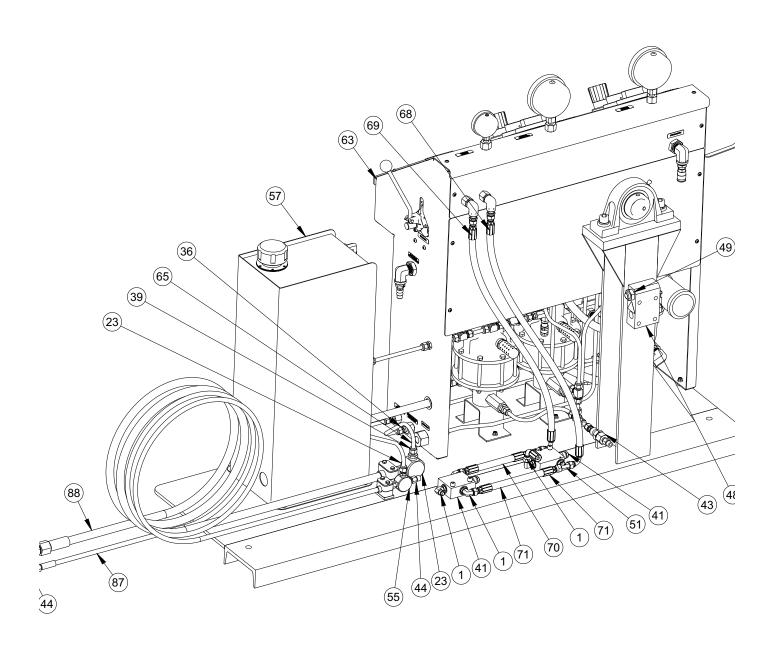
UFV-12-100T CONSOLE BACK ASSEMBLY (P/N 88847)
